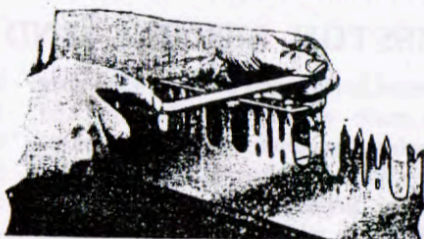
Imperial Saw Tool Used for Filing Rakers
